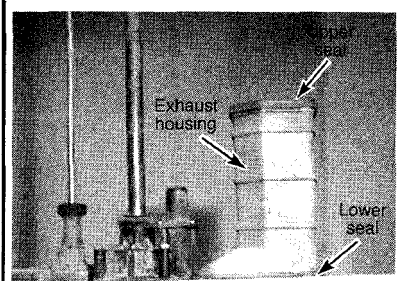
The inner exhaust housing must be properly sealed (refer to the procedure)
